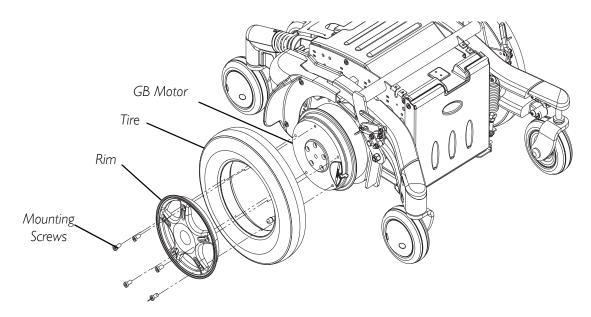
REMOVING/INSTALLING THE RIM AND TIRE FROM THE GEARLESS/BRUSHLESS (GB) MOTOR
